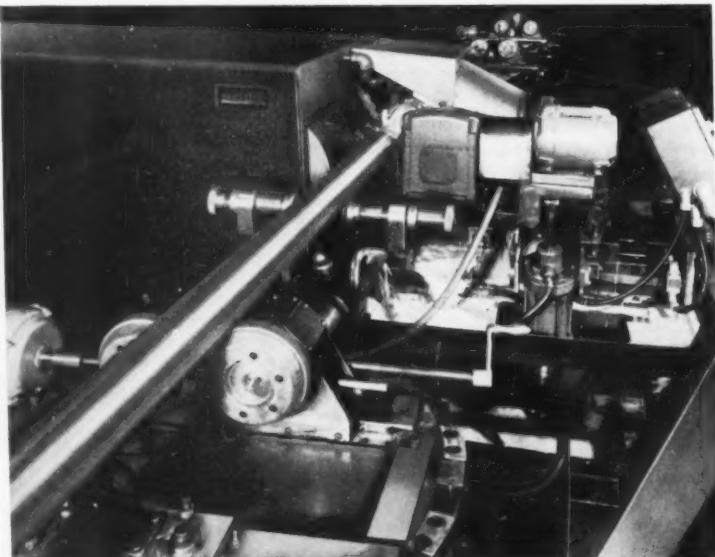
Close-up of outboard supports on centerless belt grinder (Fig. 1)
